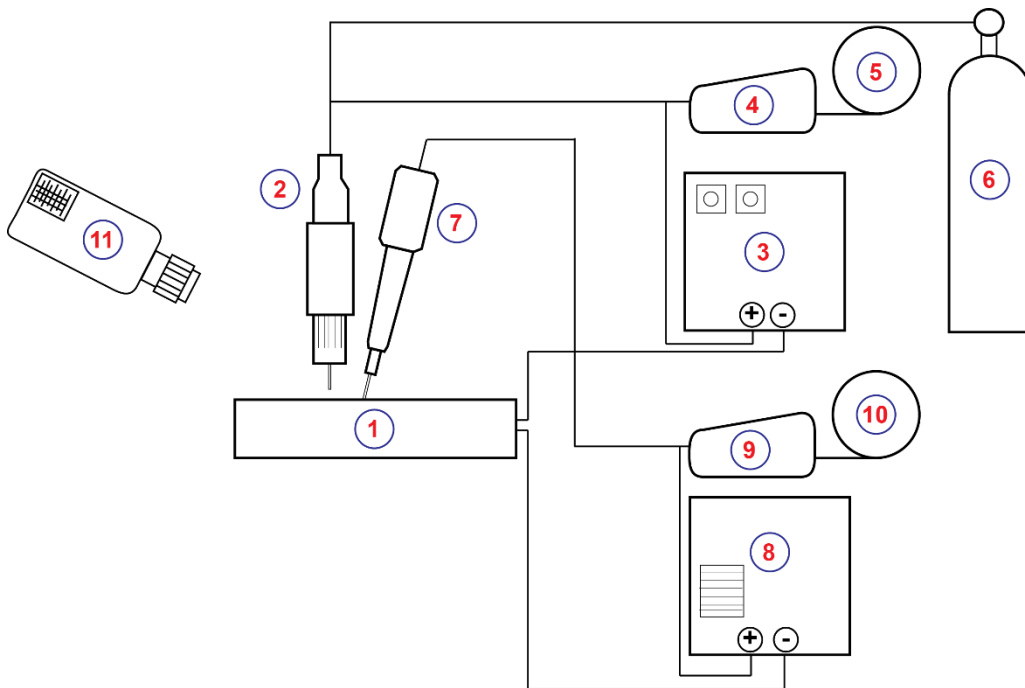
Hot-wire CO₂ arc welding system; (1) Workpiece, (2) CO₂ arc welding torch, (3) CO₂ arc welding power source, (4) CO₂ arc welding wire feeding unit, (5) CO₂ arc welding filler wire, (6) Shielding gas (CO₂), (7) Hot-wire torch, (8) Hot-wire power source, (9) Hot-wire feeding unit, (10) Hot-wire filler metal and (11) High-speed camera.
